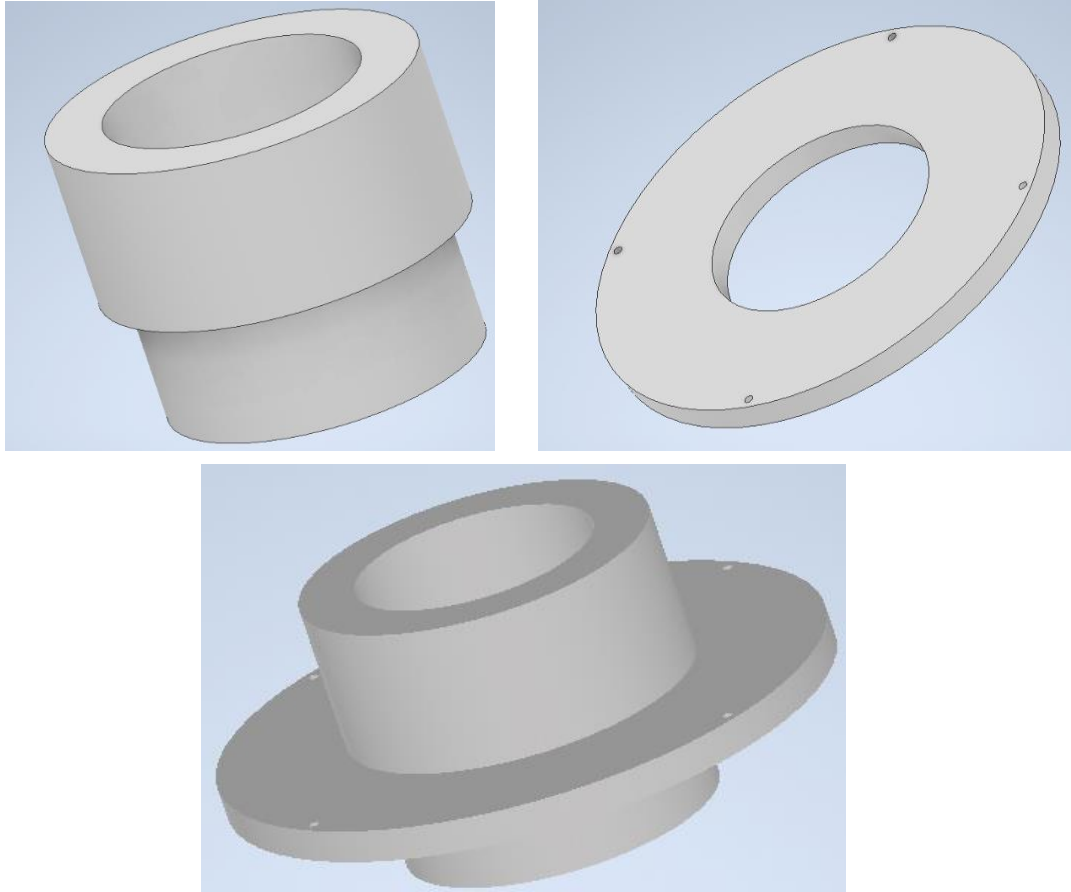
CAD design of the lid parts and assembly. Upper Left) Cup to hold liquid nitrogen Upper Right) Flange with screw holes to match vacuum chamber Bottom) Assembly of the two parts.
